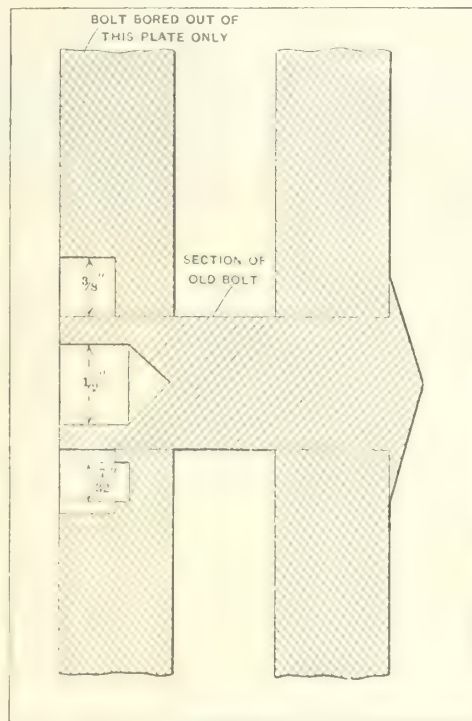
Section Through Boiler Plates, Showing Section Removed by Each Cutter.
